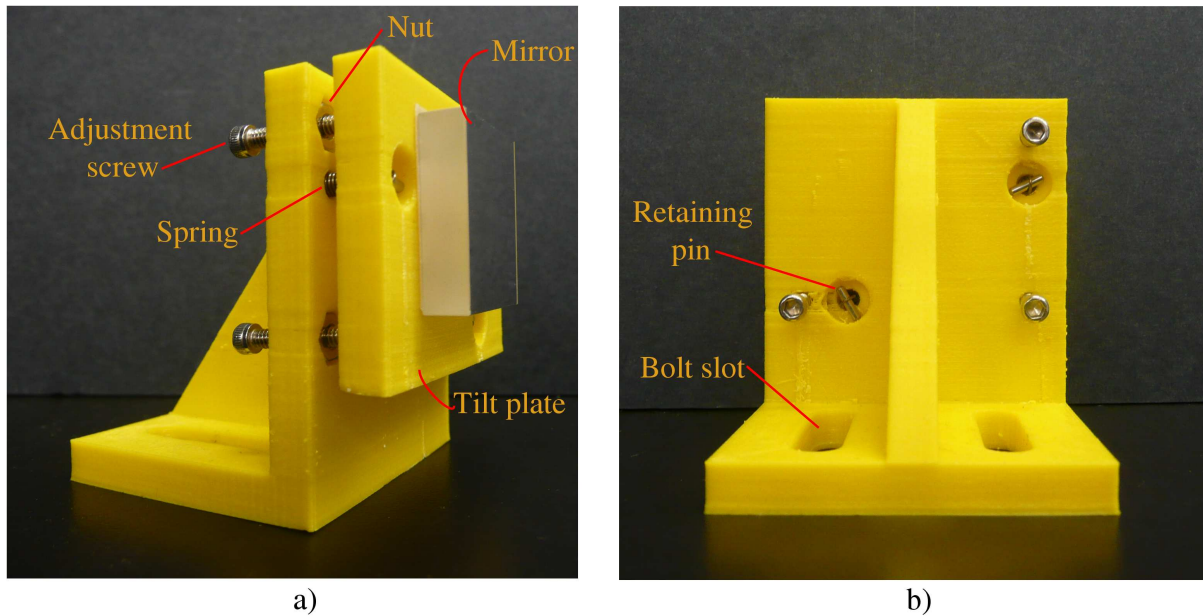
Mirror mount manufactured by 3D printing. a) side view b) back view.
